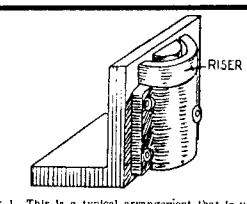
This is a typical arrangement that is used for babbittting the case for split bearings. It is absolutely necessary that both the fixture and the bearing cap be made of a metal that will not melt. The height of the riser is determined by the size of the bearing. It is placed there for the purpose of insuring that the metal in the bottom of the bearing will not melt. Other impurities may happen to be in the metal will rise to the top and this part of the metal is afterward sawed off.
